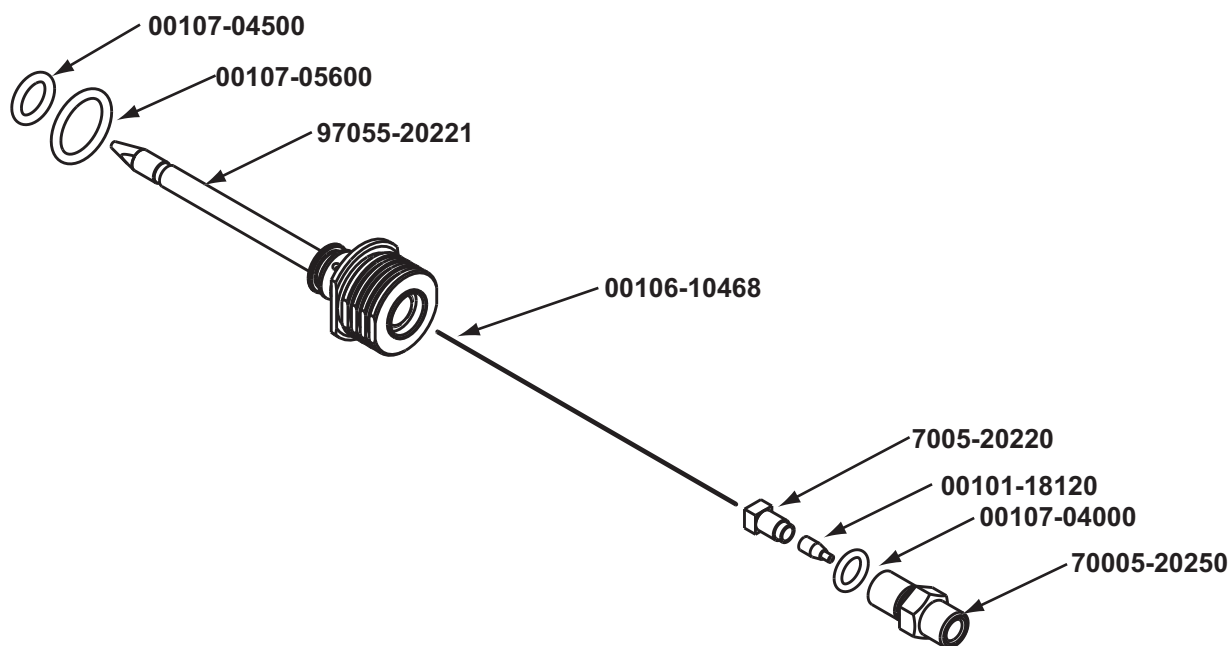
APCI probe nozzle assembly (P/N 97055-60089)
